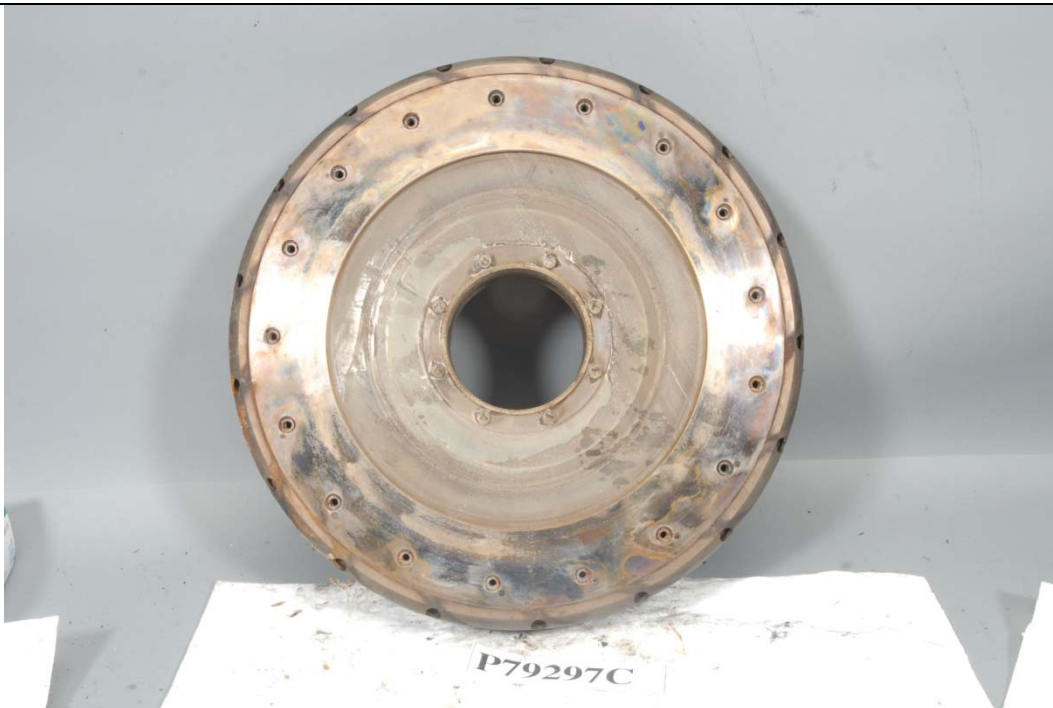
P-79297C, Combustor Chamber, Inner Skirt
